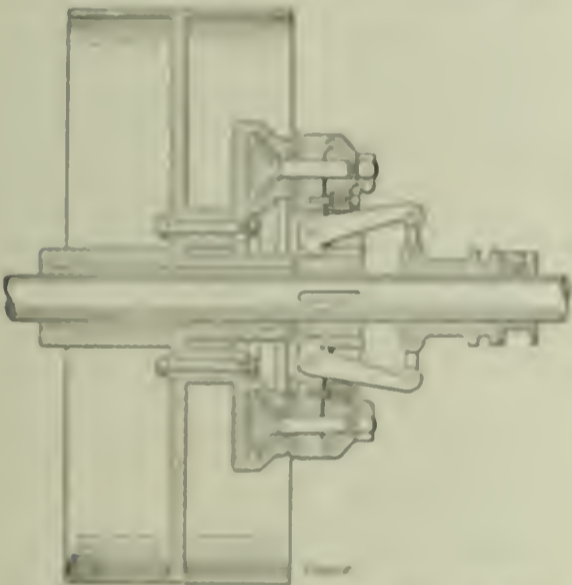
SECTIONAL VIEW OF FRISCO CLUTCH
